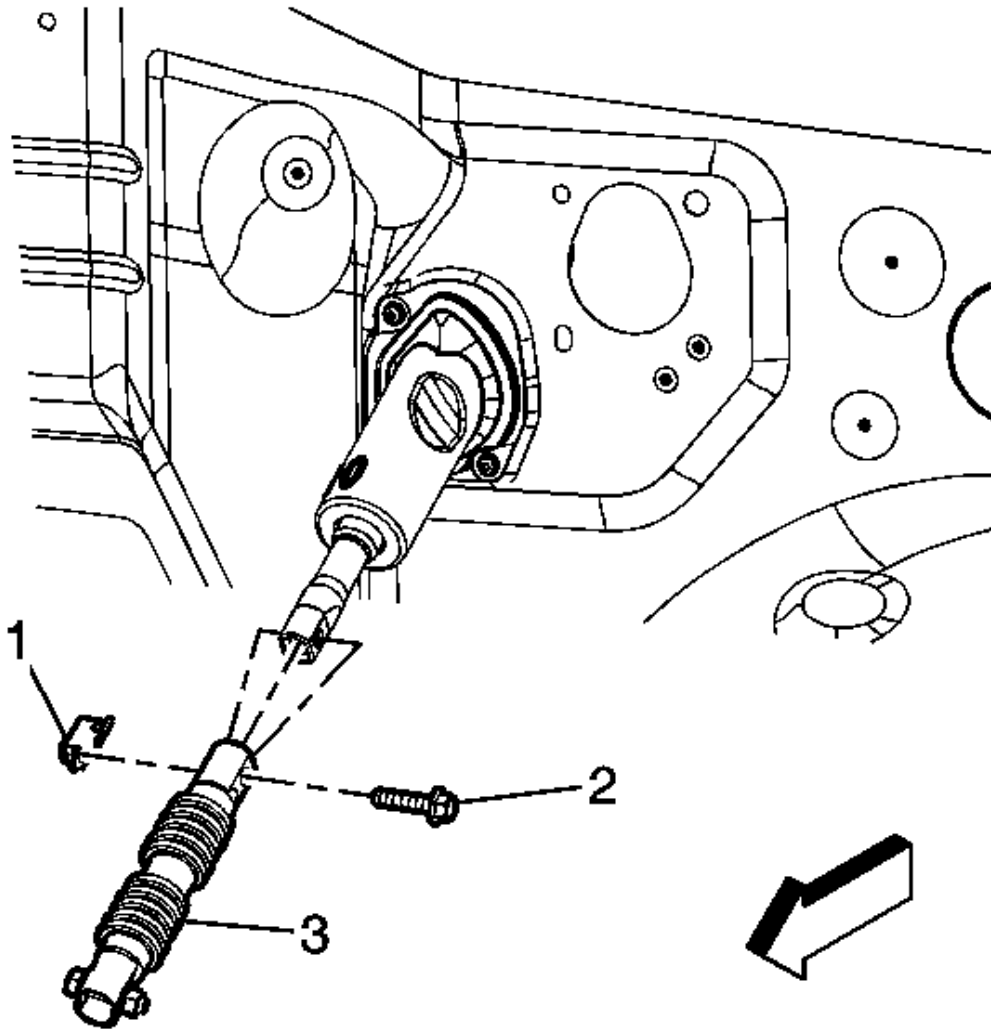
View Of Steering Shaft, Coupling Bolt & Nut
